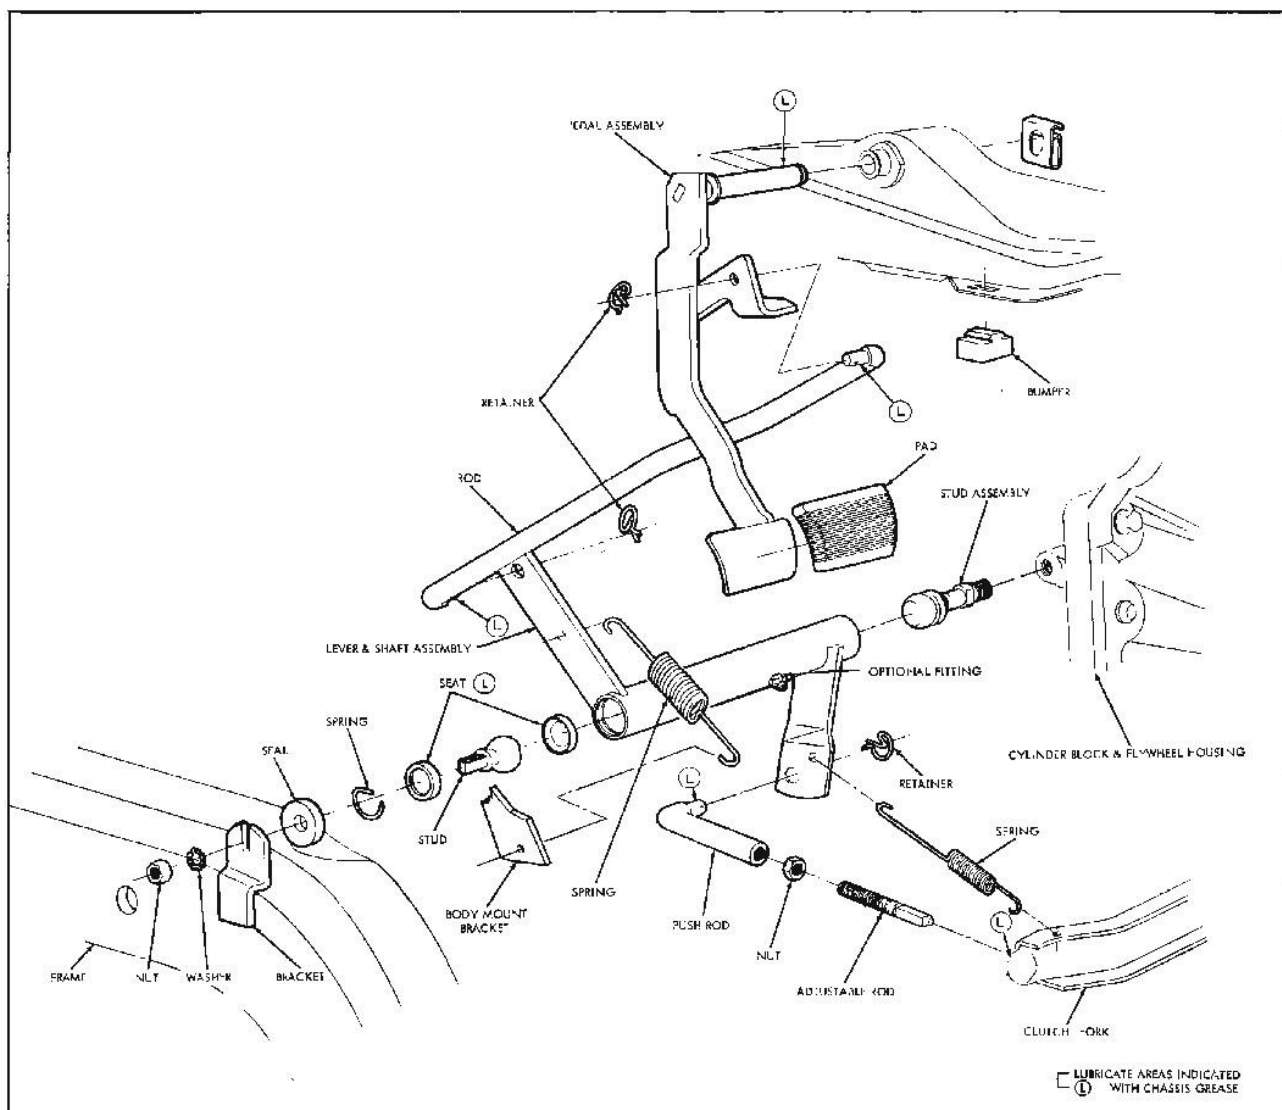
D-2 Clutch Control Linkage - 6 Cyl.
